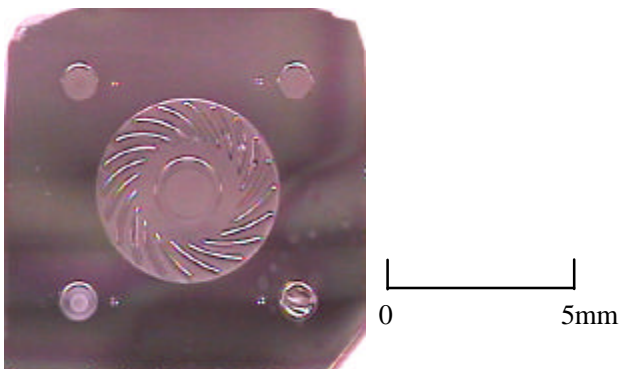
A photograph of the Si mold for a gas turbine of 5 mm diameter.
